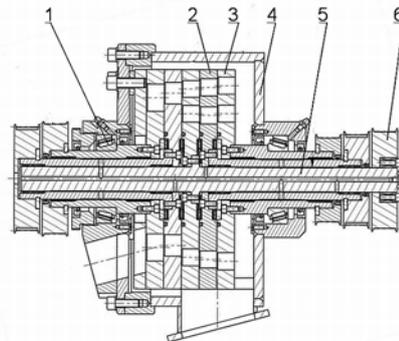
The working unit of the five-disc, multi-hole RWT-5KZ grinder [4]: 1- bearing, 2- grinding disc, the so-called „preceding” disc, 3- grinding disc, the so-called “next” disc 4- body, 5- shaft, 6- pulley
